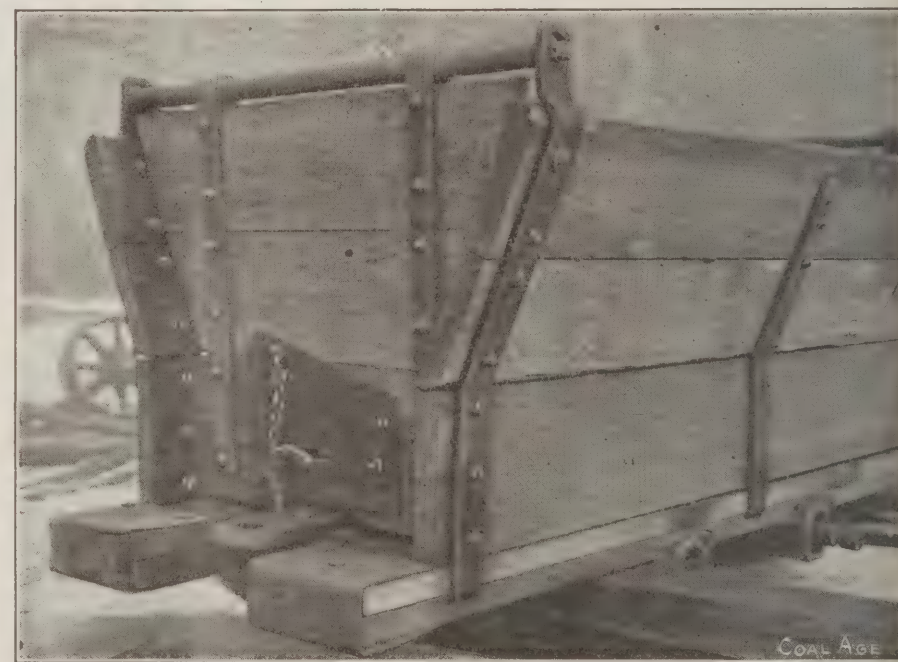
VIEW OF THE DOOR END OF A MEDIUM OR LARGE CAPACITY BITUMINOUS CAR
